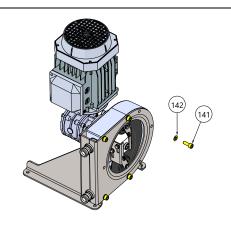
Unscrew the front connection bracket screws [141] and remove them with their washers [142].
